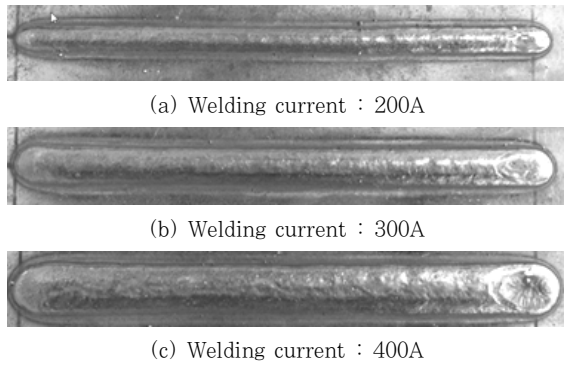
Weld bead appearance when applying new cable wiring
